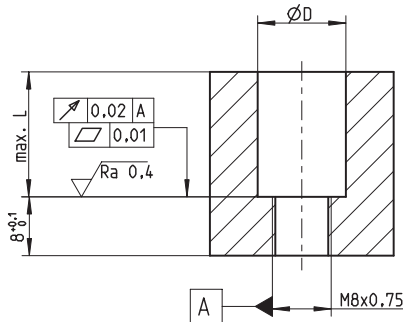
Flush mounted Sensor. Bore Ø according to mounting tool. See picture 4 and picture 5
